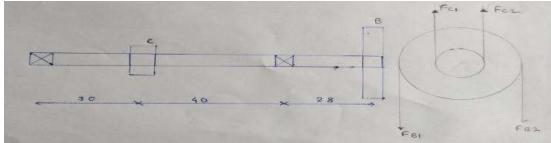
Axis 3 intermediate shaft, pulley, bearing assembly
